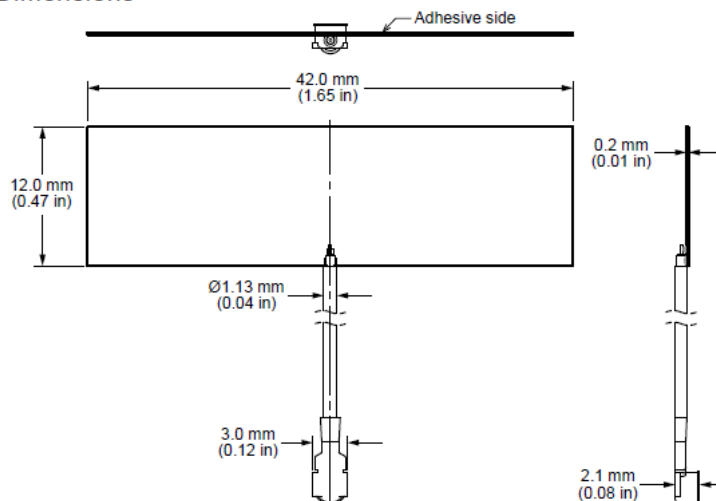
ANT-W63-FPC2-UFL-100 Dimensions
